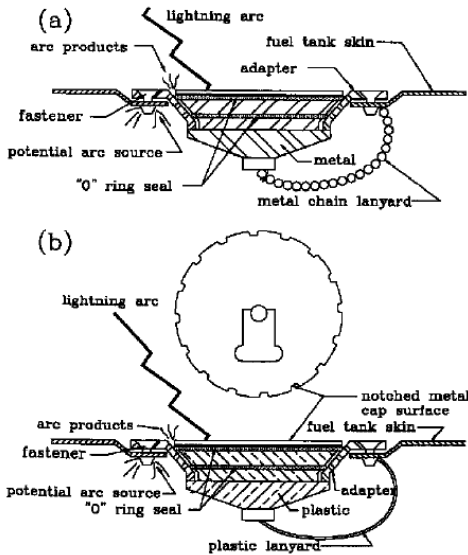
Fuel filler cap designs<sup>[4]</sup>
